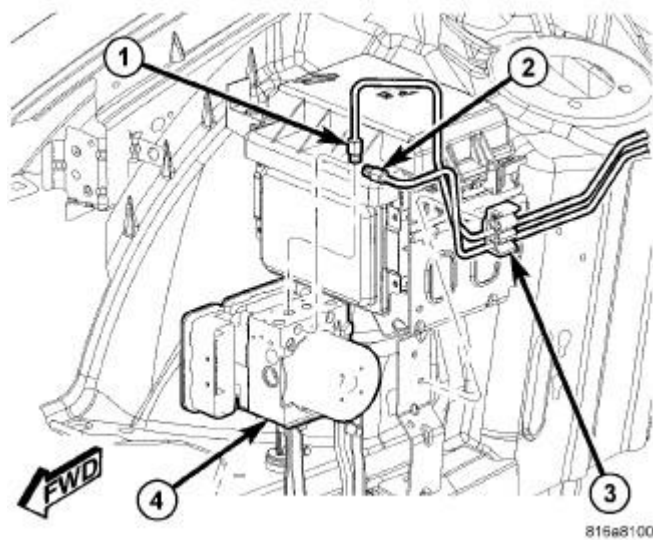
LEFT REAR AND RIGHT REAR BRAKE TUBES AT ICU
